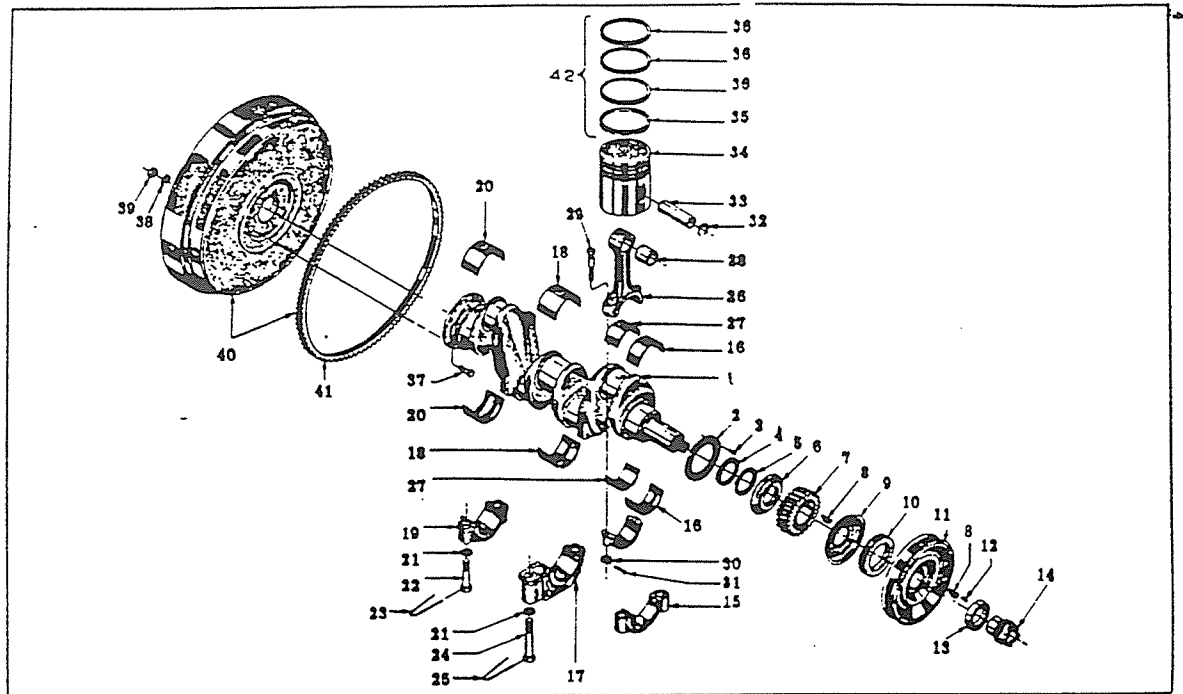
ENGINE PARTS GROUP - INTERNAL VIEW
